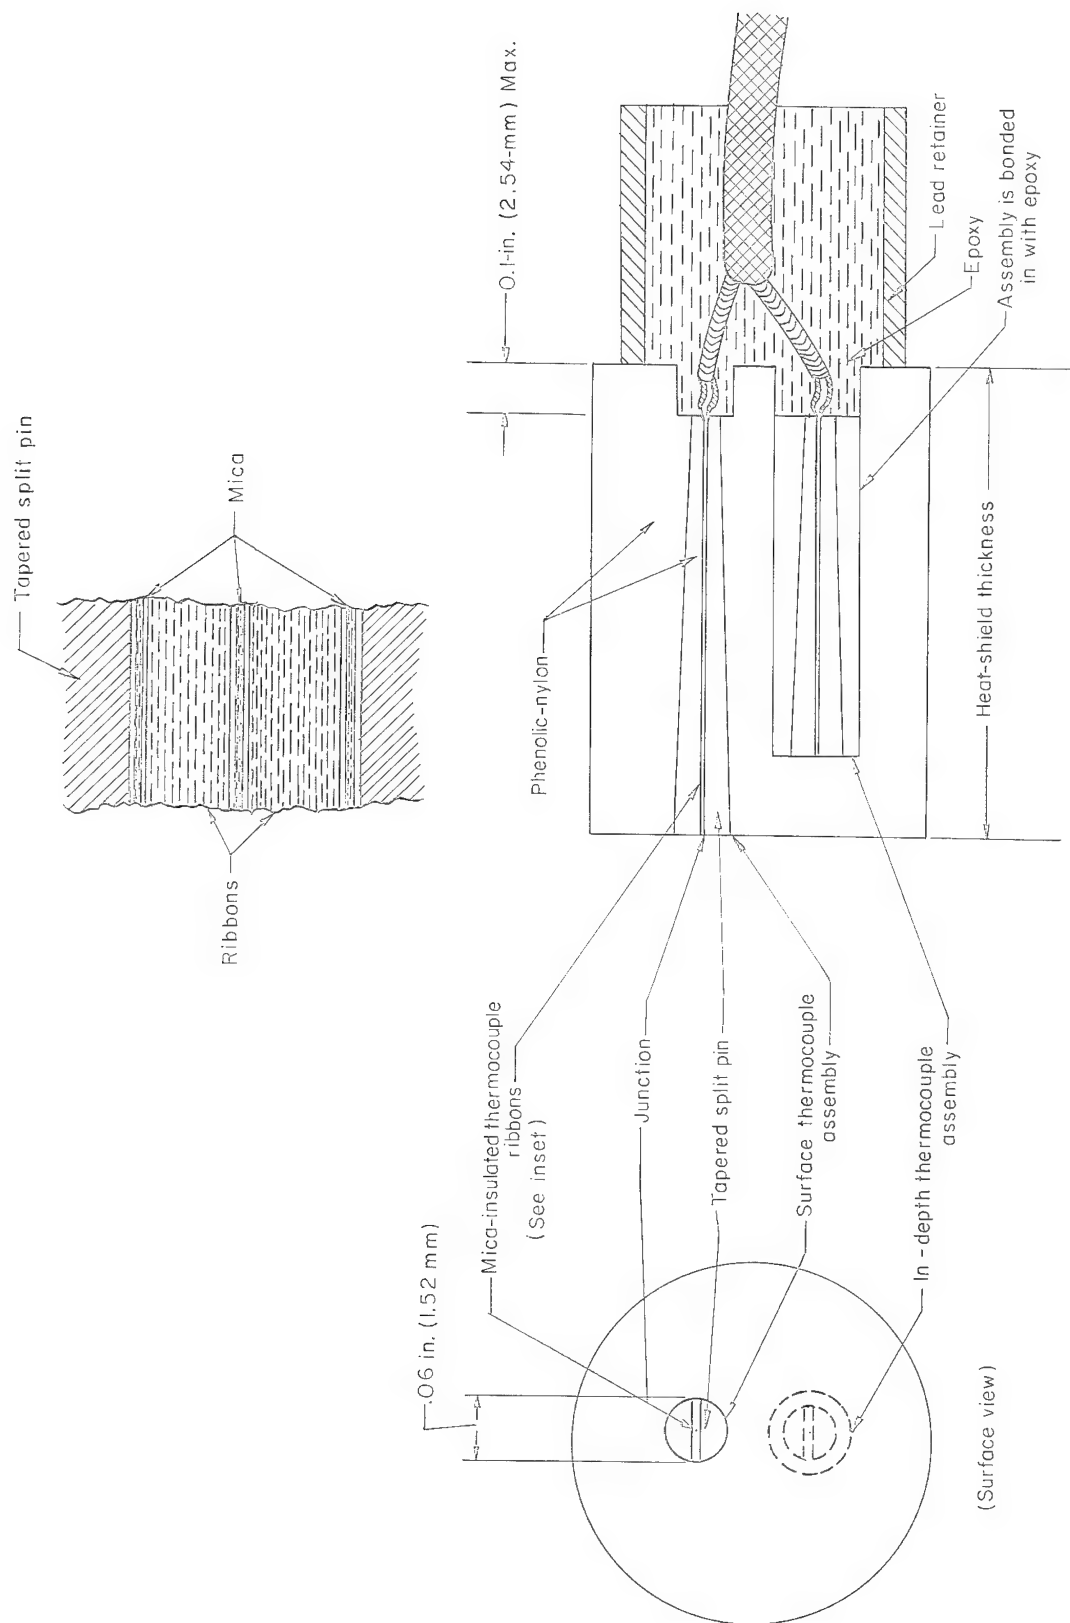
Sketch of a typical thermocouple plug with one surface thermocouple assembly and one in-depth thermocouple assembly.
